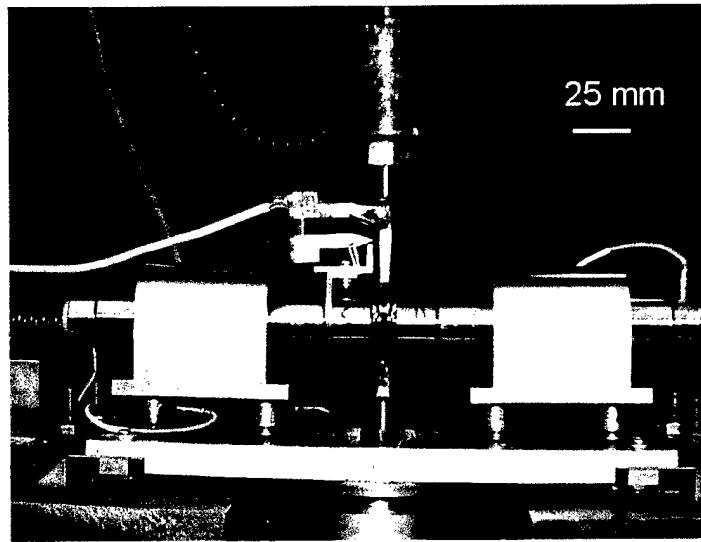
A photograph of the MIT fretting fatigue fixture. The extensometer can be clearly seen to the left of the specimen. The width of the bar specimen is 4.74 mm.
